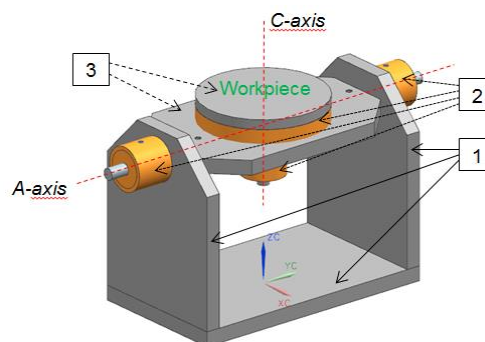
General view of the rotary table designed: 1- Machine structure; 2- Aerostatic bearings; and 3- Rotate and tilt tables
